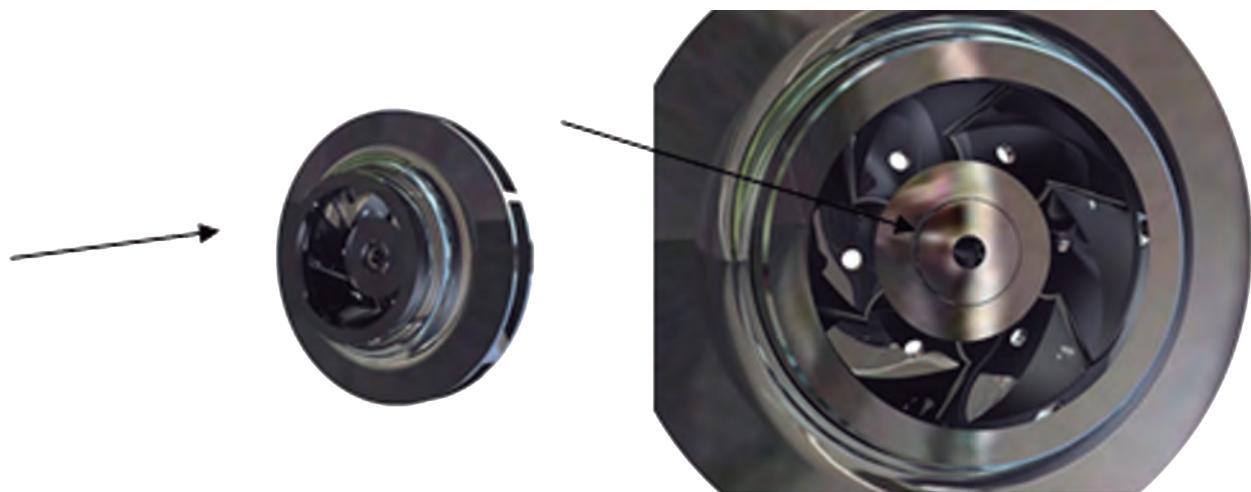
Placing the impeller lockwasher into the shaft's impeller side.
